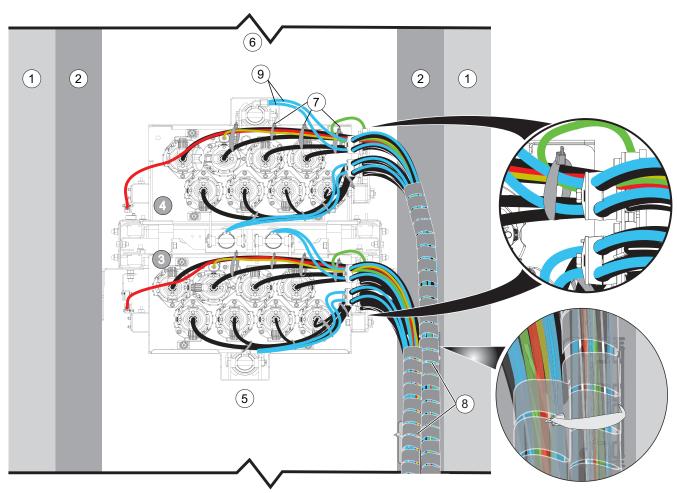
Cable Routing through Standard Bracket Assemblies - Spiral Wrap
